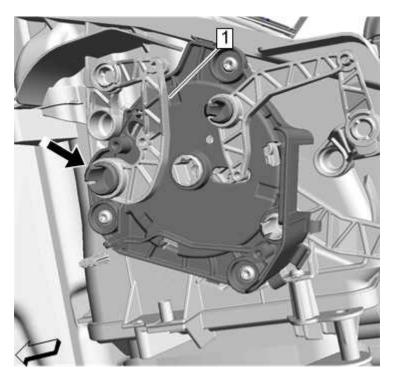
Defroster Control Lever Courtesy of GENERAL MOTORS COMPANY
